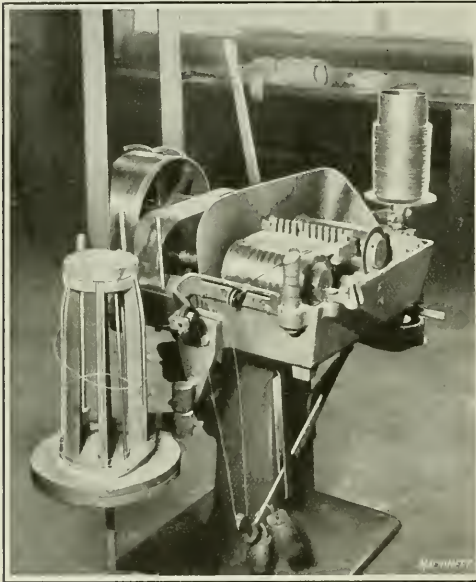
Another Wire-drawing Machine, showing Automatic Arrangement for stopping
